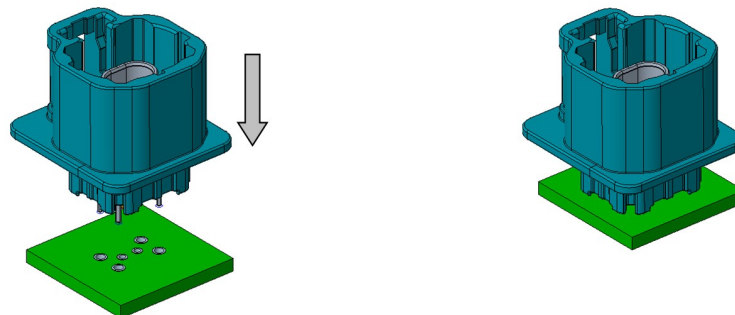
/ Pin Header 1P 180° sealed, w/o cap, TE-No. 2397248
